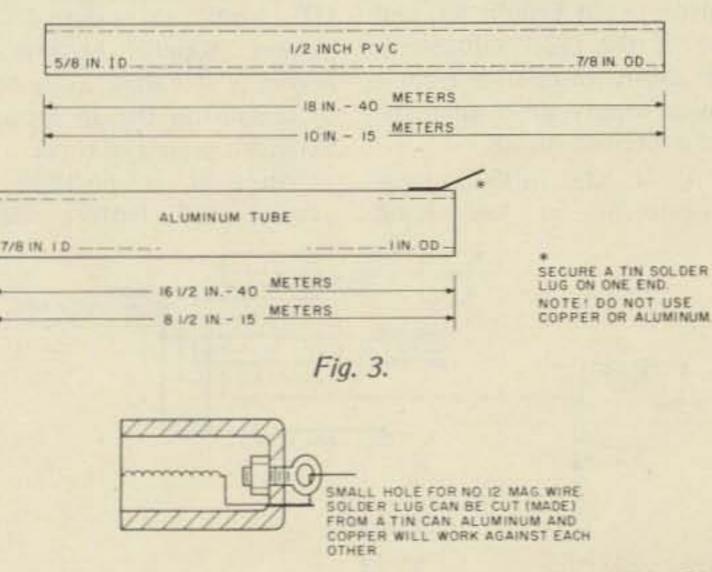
The coil will expand to make a nice fit inside the PVC tube. The aluminum fits snugly over the PVC, and the cap rims help hold the aluminum tube in place. It all makes a very nice looking assembly.
